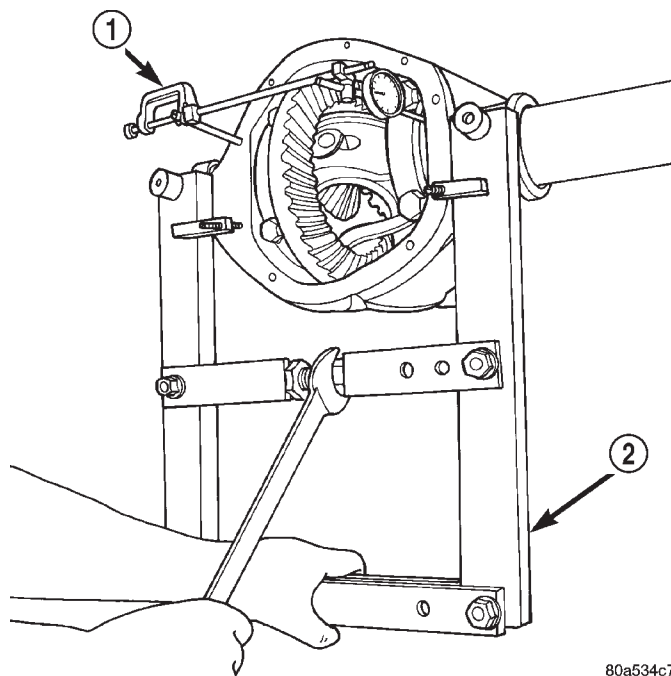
SPREAD DIFFERENTIAL HOUSING
